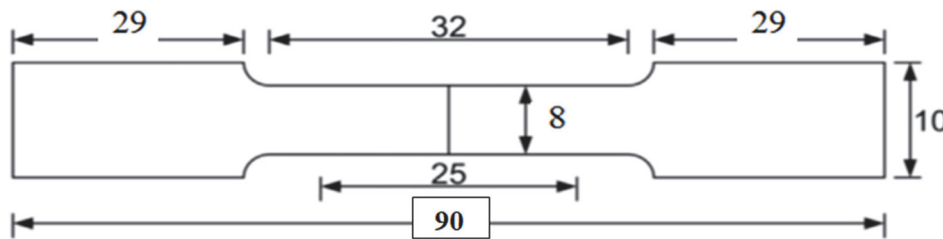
Tensile testing specimens as per ASTM E8M-04 standards.
